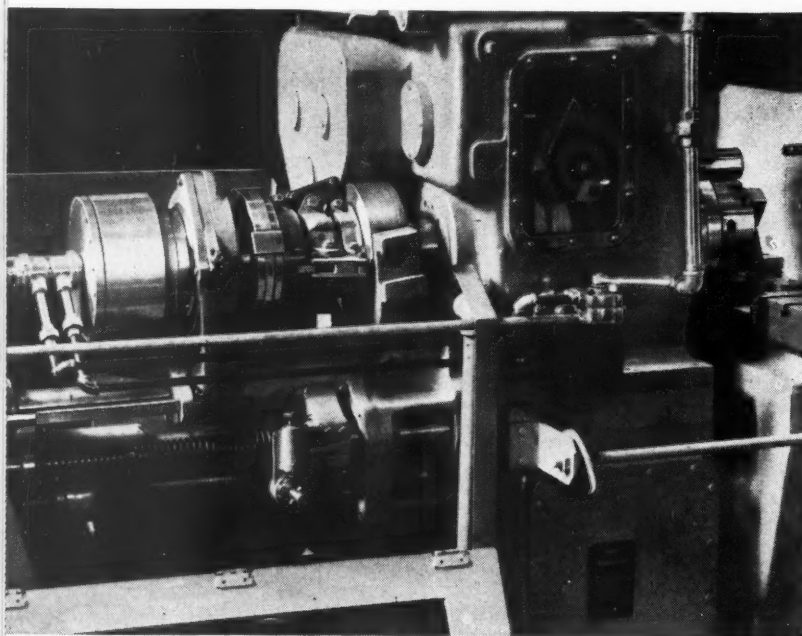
An air cylinder with pull-rod, oil-seal, chuck adapter, and an air-operated chuck are substituted for the bar-stock feed parts in converting the machine to chucking work
